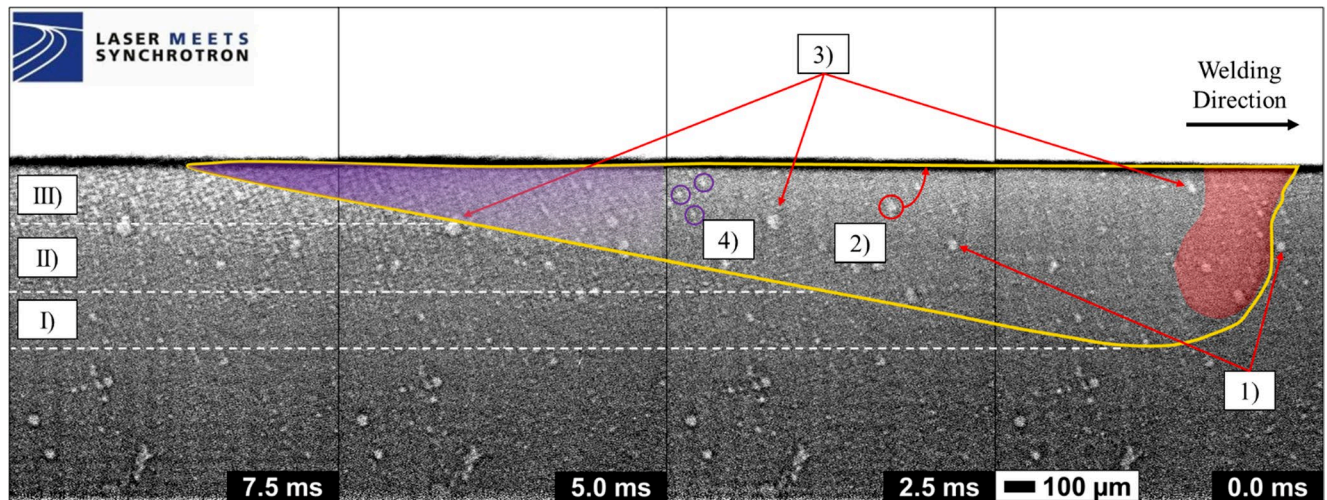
Stitched image sequence of X-ray images showing the weld pool and capillary (reference material). The shape of the weld pool is indicated by the yellow line, the capillary is highlighted in red. Laser
